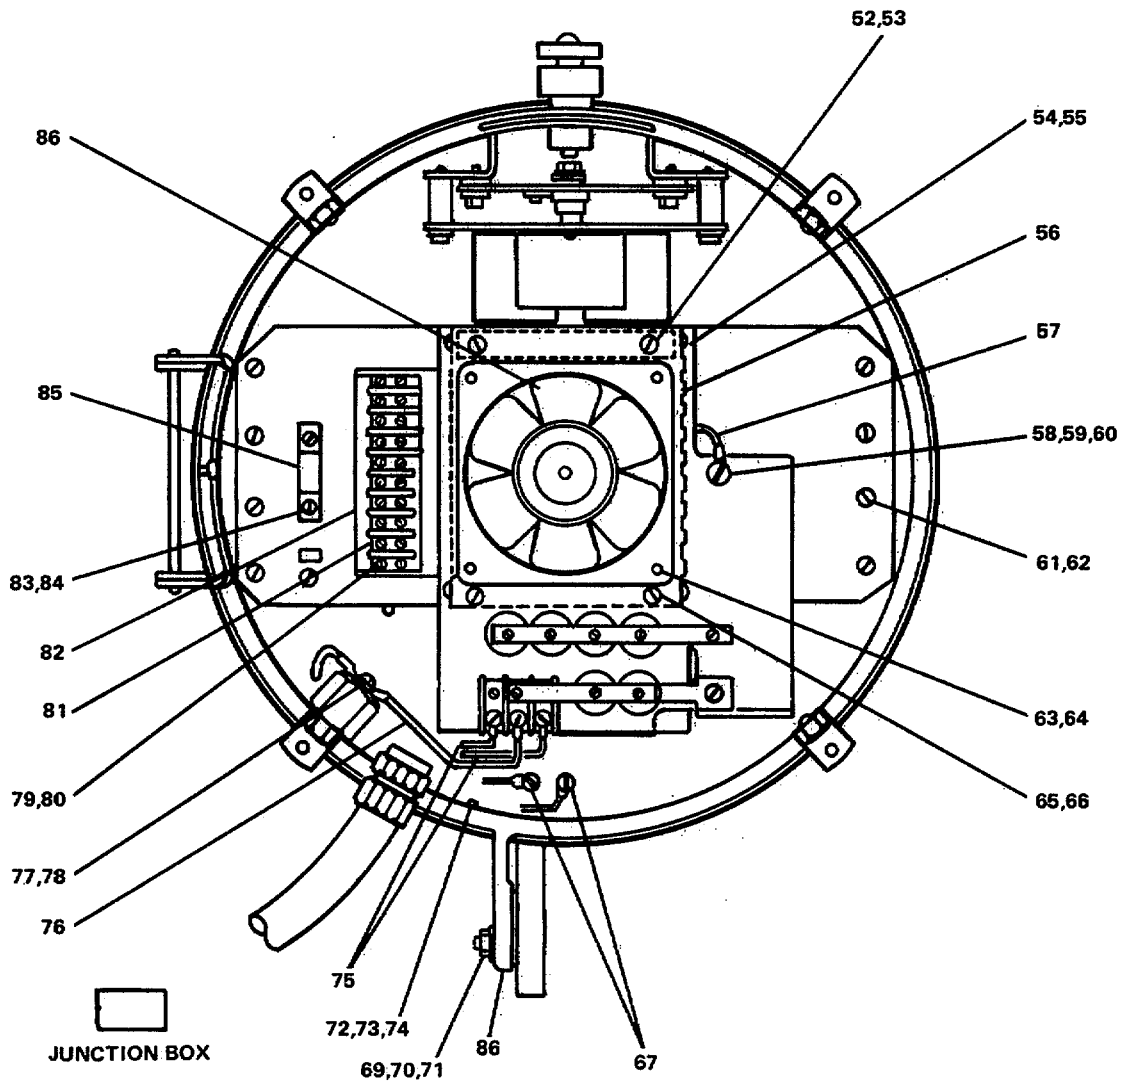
Replace/Repair Drum Assembly (Sheet 2 of 4).
